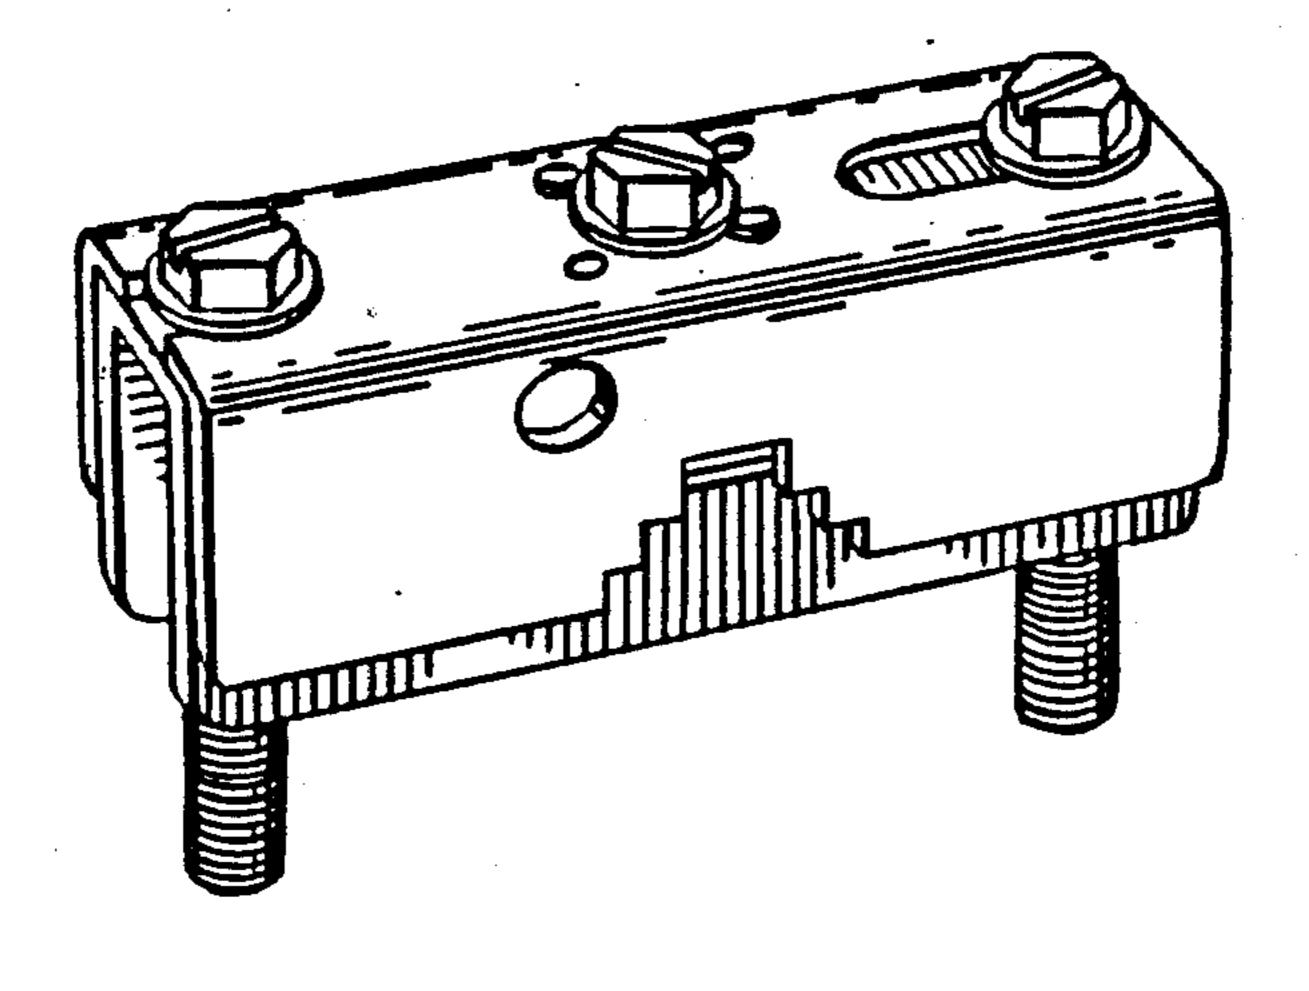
is an enlarged side view of FIG. 7 in the open position;
